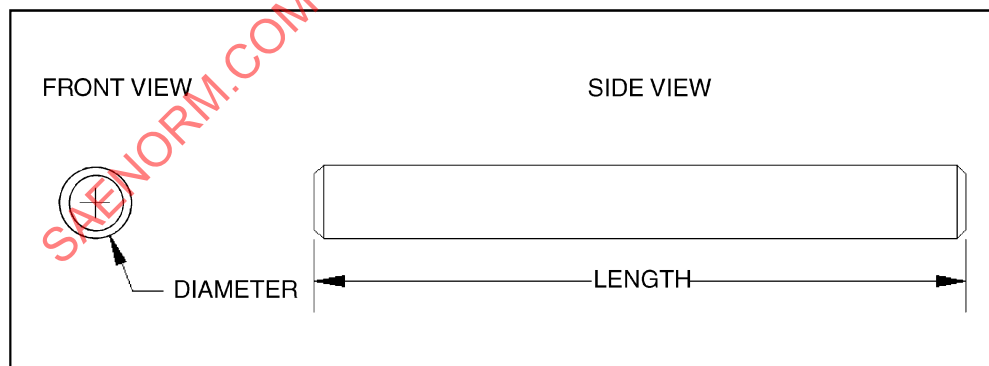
TRACKING TRANSMITTER DIMENSIONS
